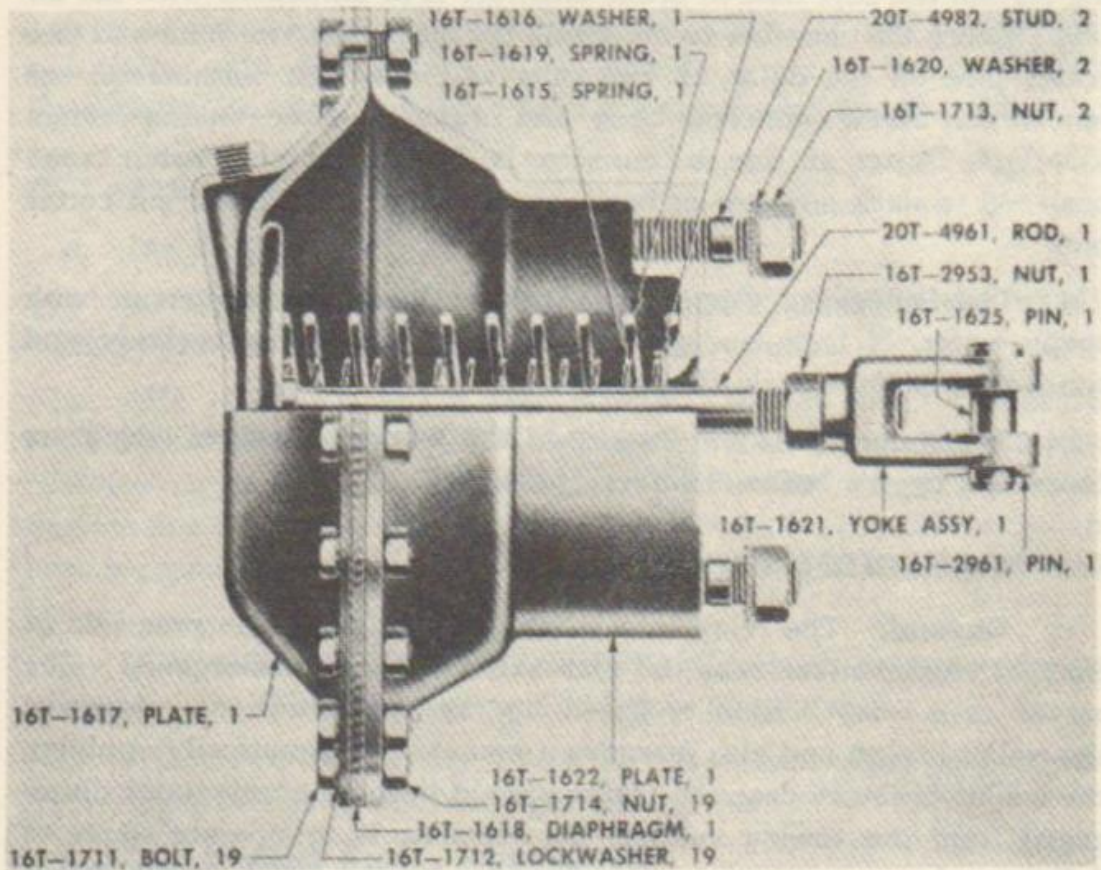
SEMITRAILER BRAKE CHAMBER—SECTIONAL VIEW
